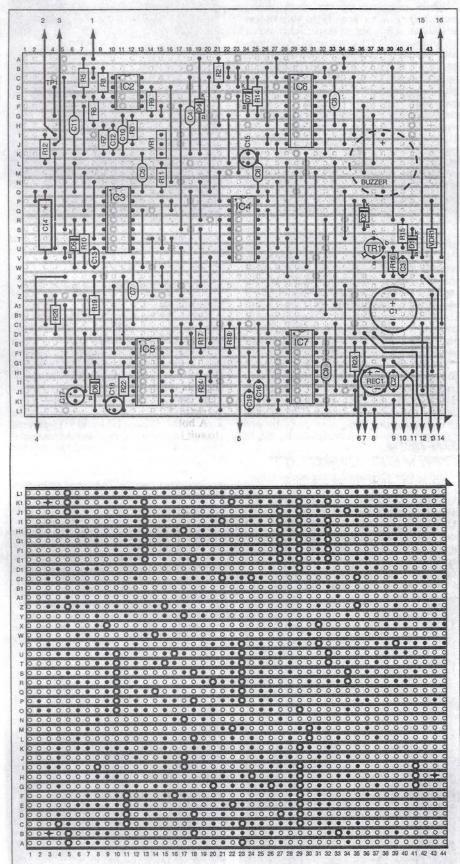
Topside component layout and underside stripboard track cuts and solder joints for the main alarm circuits.
